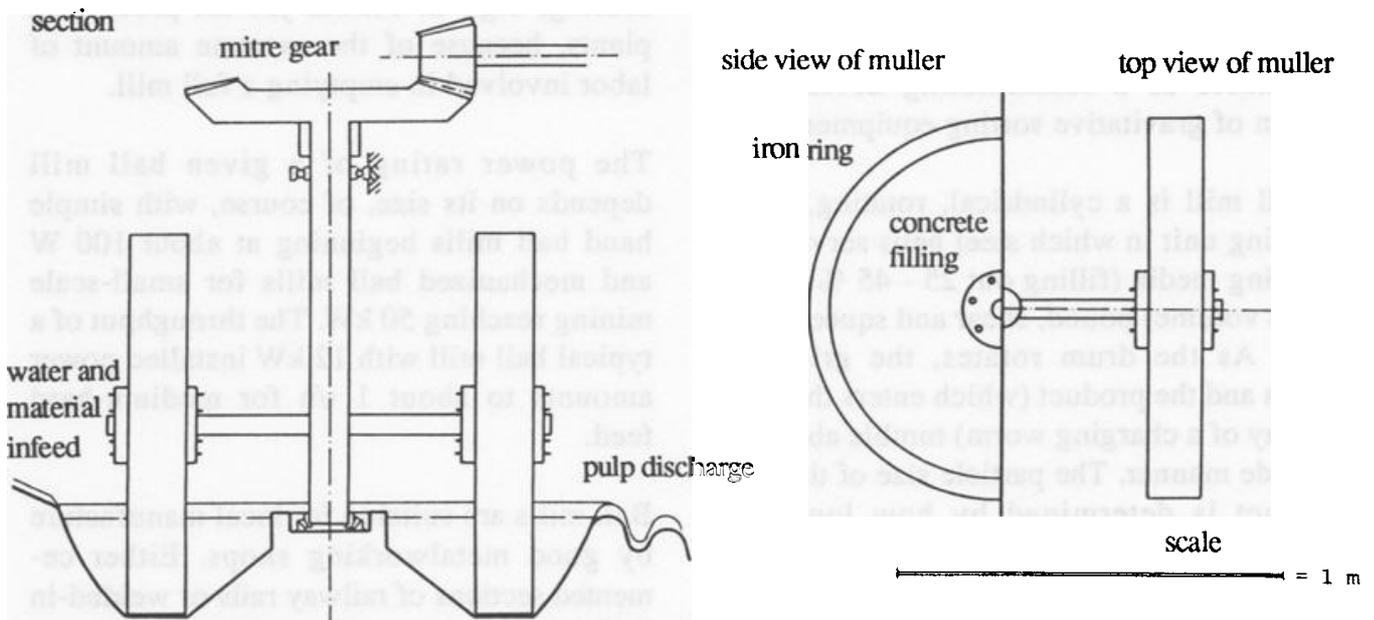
Constructional sketch of a Bolivian edge mill [Priester]
